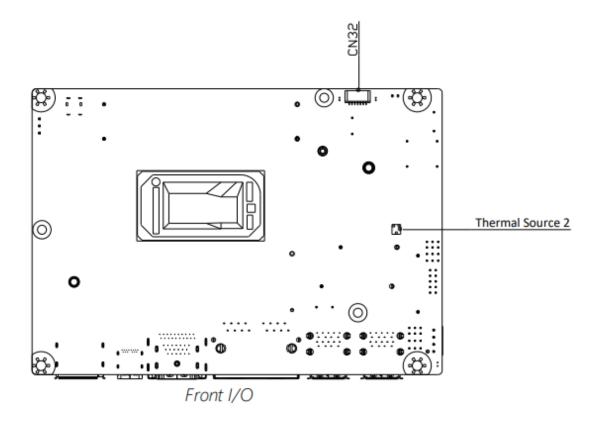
Jumpers and Connectors Location- Board Bottom
